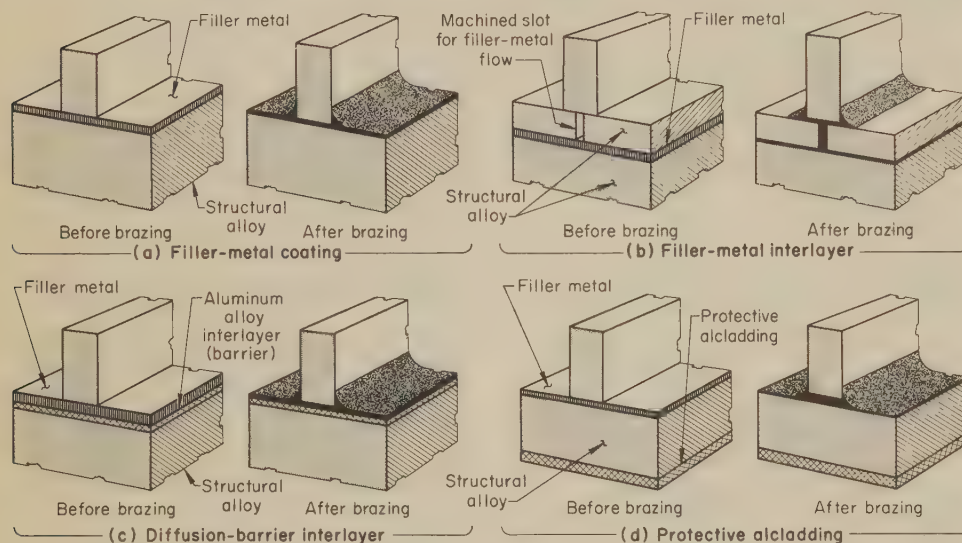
Four types of aluminum brazing sheet, shown in joints with a vertical member
